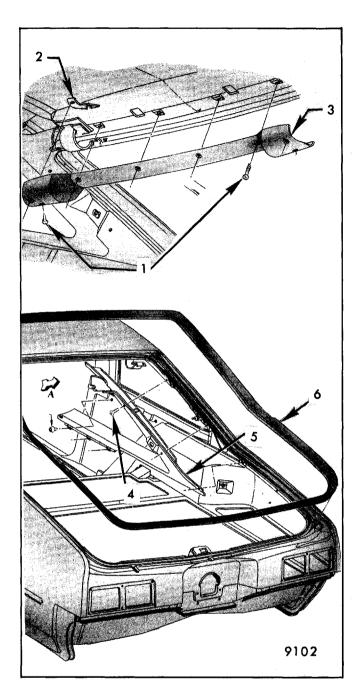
X-17 Weatherstrip and Trim Removal
